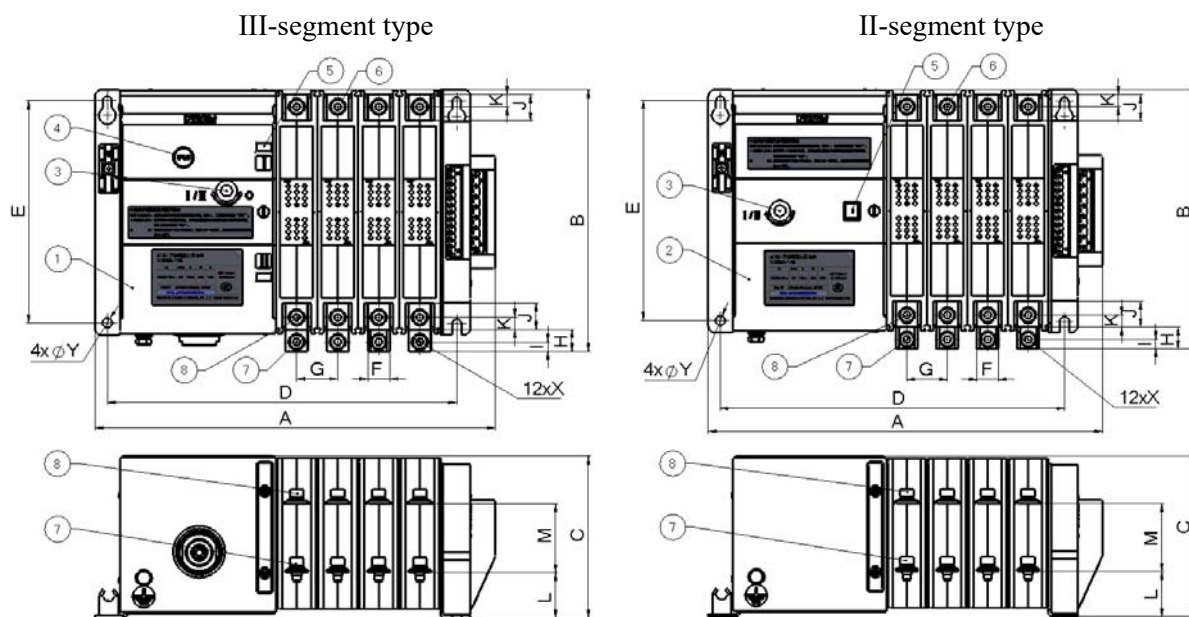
External dimensions and installation dimensions of mechanism body of split switches
